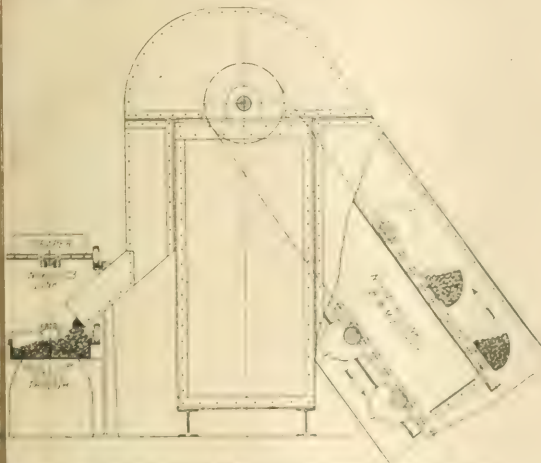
CROSS SECTION OF SCRAPER CONVEYOR AND ELEVATOR.
